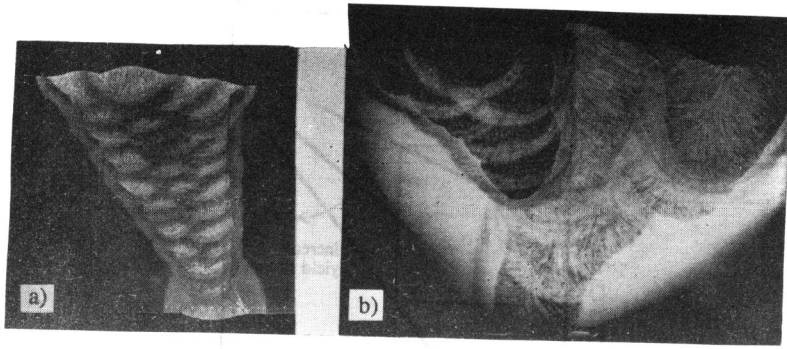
The 1/2K weld preparations, a) SAW weld joint, b) SAW weld joint repair weld deposit.
